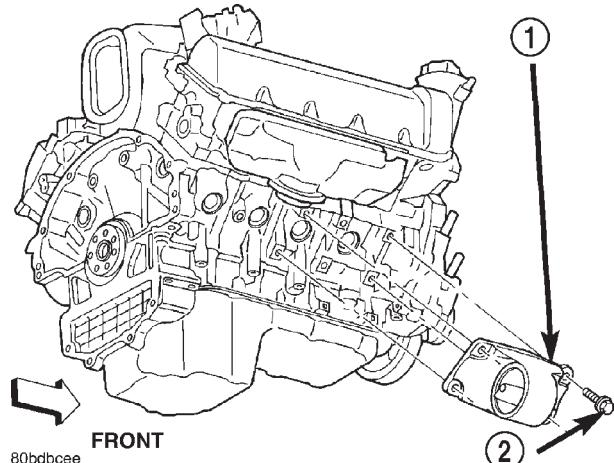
Engine Insulator Mount 4x2 Vehicle—Right Side
